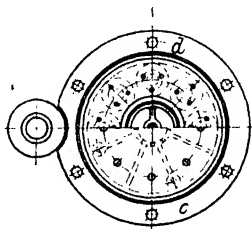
(right) shows the way in which the valve works when oxygen gets back from the torch.
